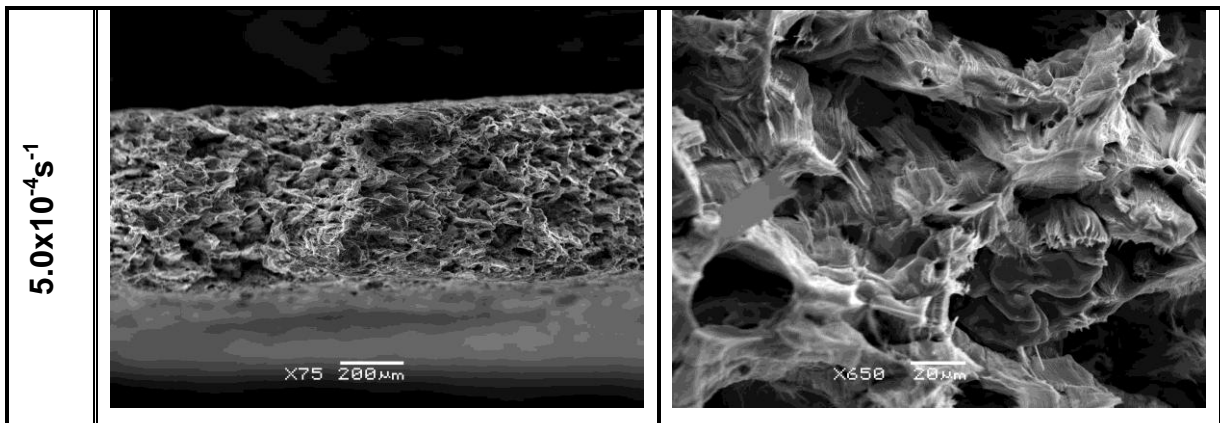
T4P sheet tensile tested at 450°C fracture surface images (SE mode).
